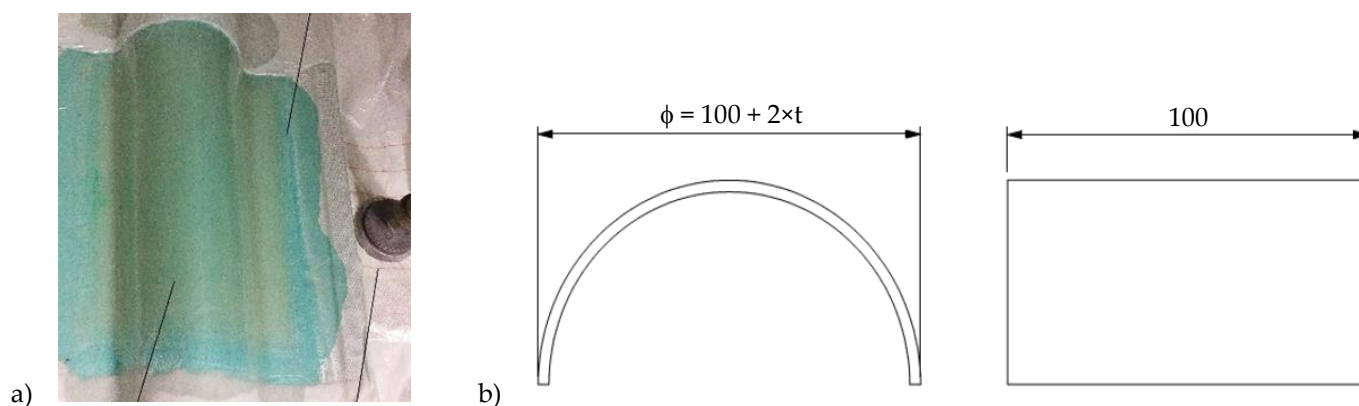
(a) Process of manufacturing, (b) Specimens' geometry and dimensions in mm.
